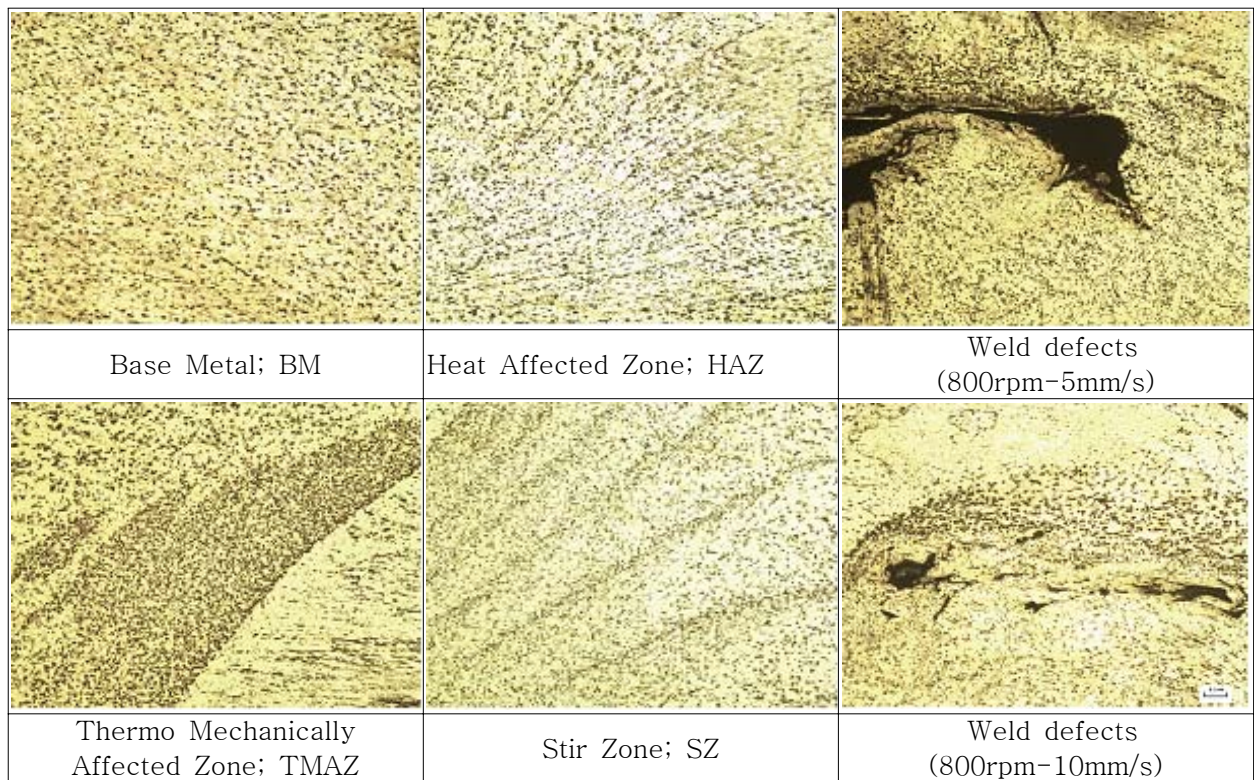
Cross sectional view of friction stir welded A6005-T6 (×100)
